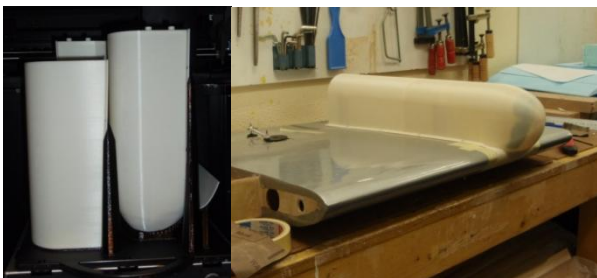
Prototype IV manufacturing process. Fairing, placed and fixed onto wing
